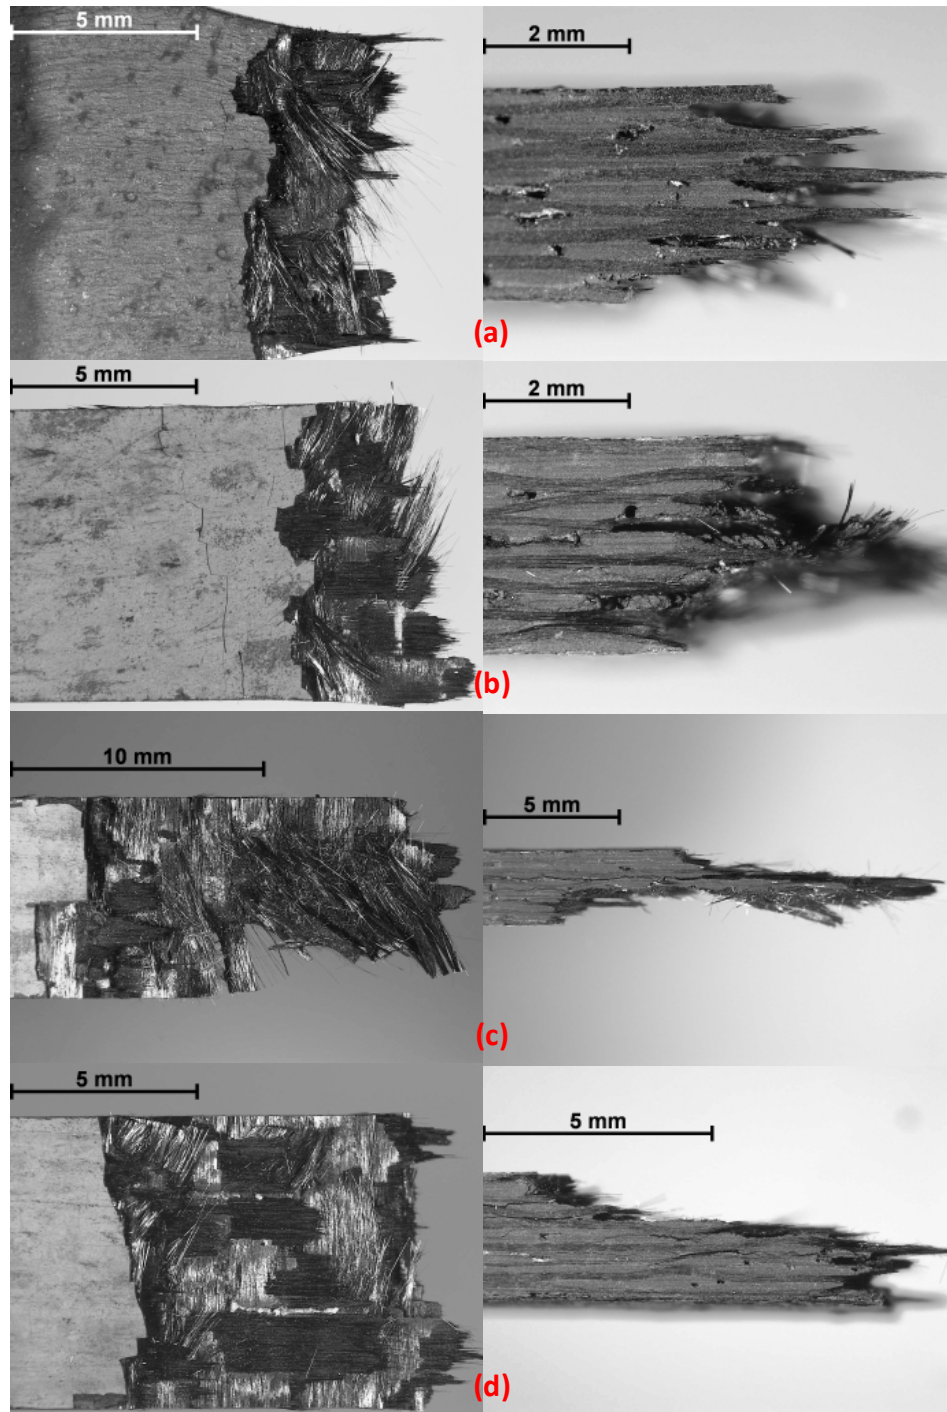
Fracture surfaces obtained in tensile tests of C/SiC specimens (left: face-up; right: edge-on) – (a) virgin specimen; and specimens with prior heat treatments at (b) 1300°C for 40 h; (c) 1300°C for 100 h; (d) 1200°C for 100 h
